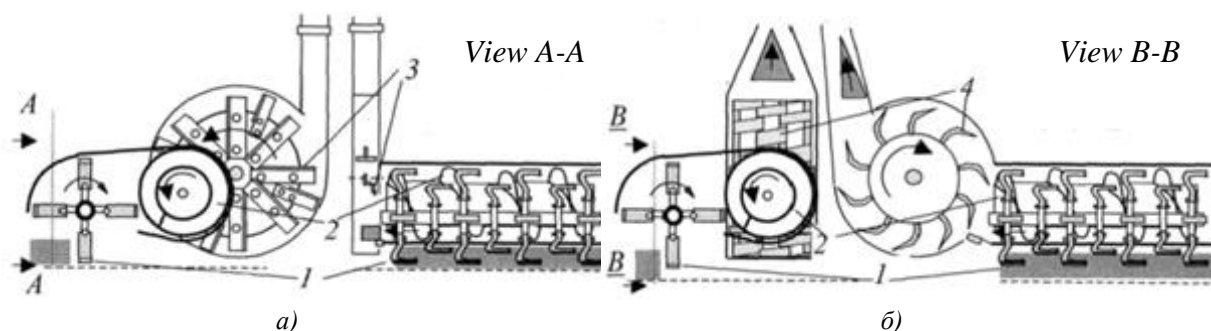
Shredding machine of double grinding with disk (a) and drum (b) shredding-throwing apparatus: 1 - rotor knife; 2 - transverse auger; 3 - a knife of a disk; 4 - knife drum
